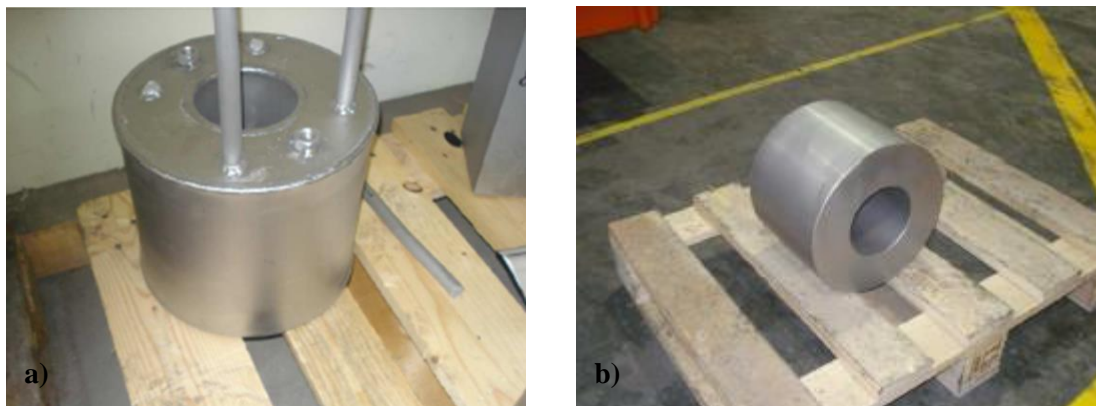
Encasing of powder material (a) and the finished product after annealing and machining (b) [11].
